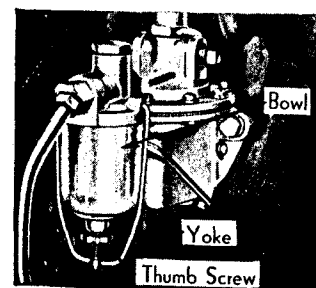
The gasoline filter should be removed and cleaned whenever water or sediment appears in the bowl.
